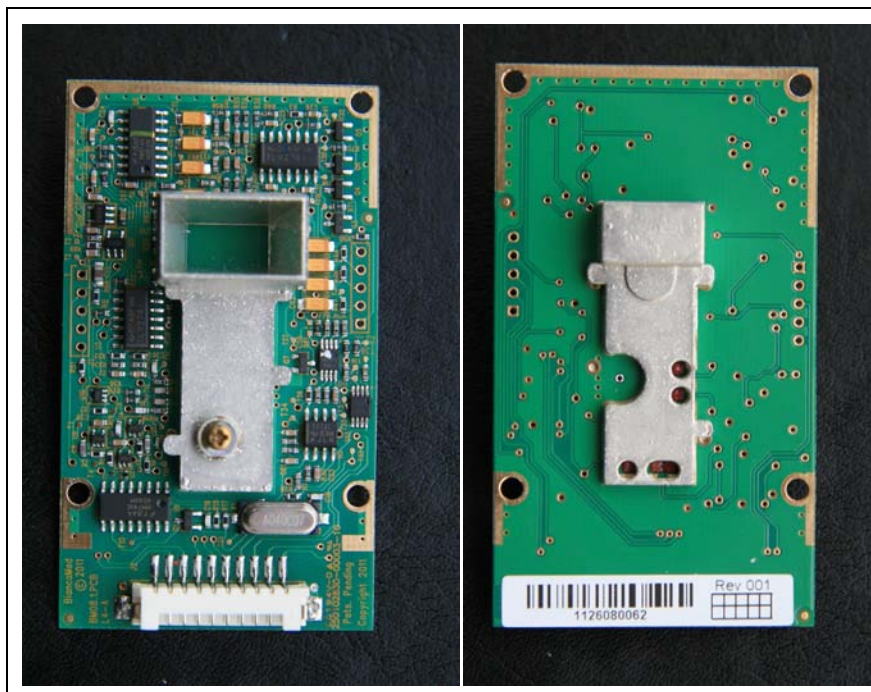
PCB Layout, showing the Antenna Horn on the top side and the connector at the bottom
